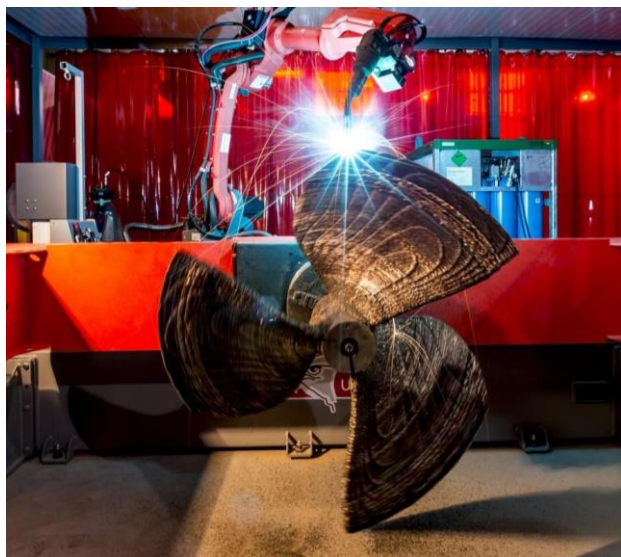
Printing WAAMPeller (courtesy RAM-LAB)
